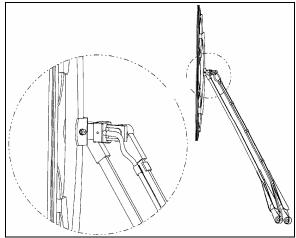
WINDSHIELD WIPER (MOTOR SIDE) 23329
